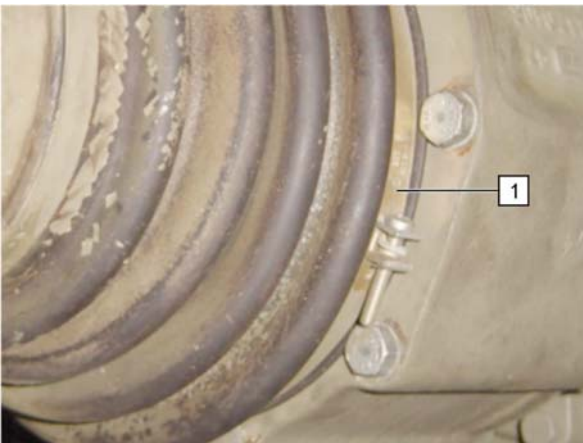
Intermediate Axle Drive Torque Ball Housing - Installation
